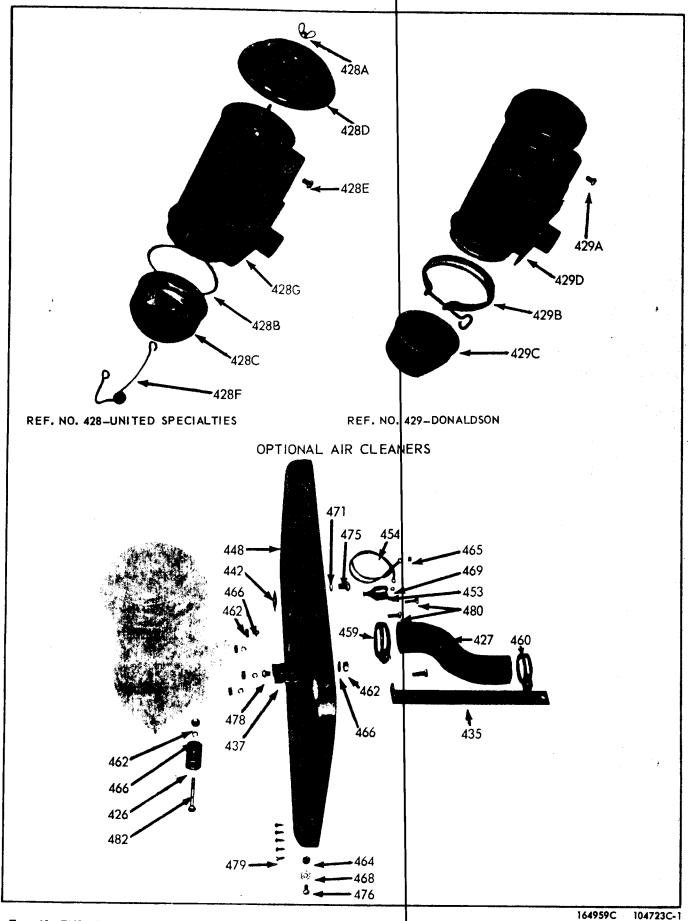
, END PANEL AND AIR CLEANER FOR ENGINE HOUSE WITH FUEL TANK AT TAKE-OFF END
